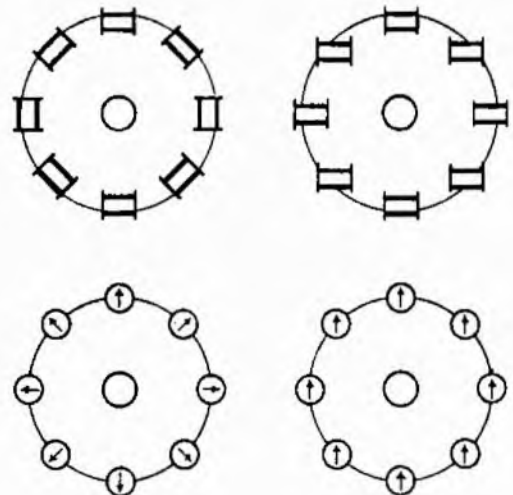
FIXED-BOBBIN LAYING-UP MACHINE.
